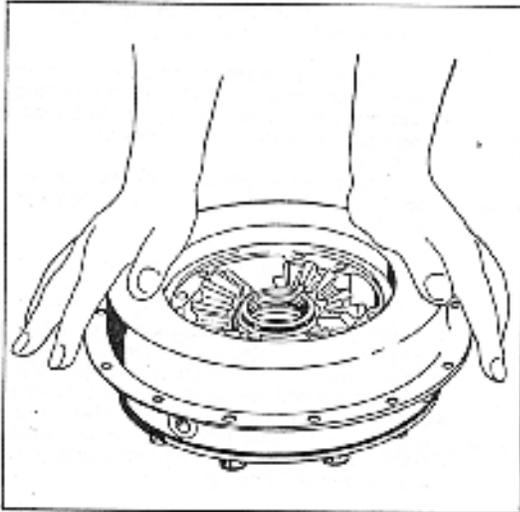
Installing Clutch Cylinders on Bevel Gear Carrier.
